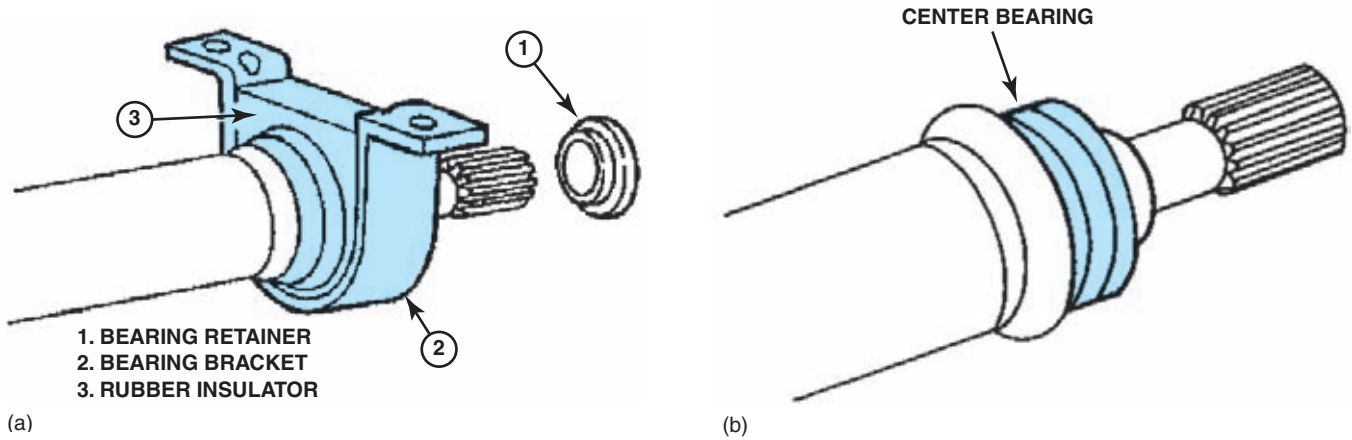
With the drive shaft removed and separated, the bearing retainer and bracket (a) and a faulty center bearing can be removed (b).
